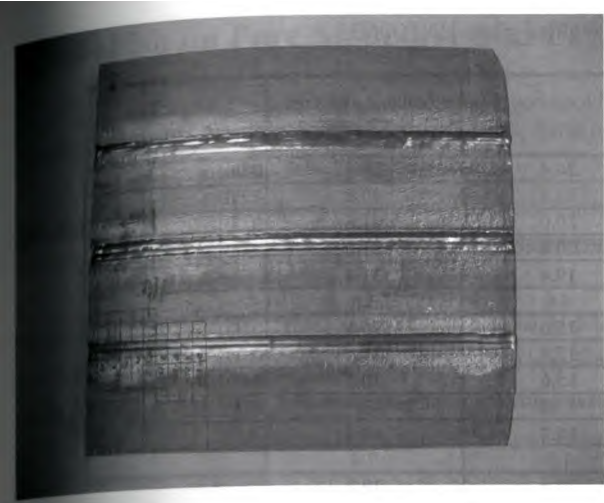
Plate XH6005-B1 after welding showing locations of tensile specimens
